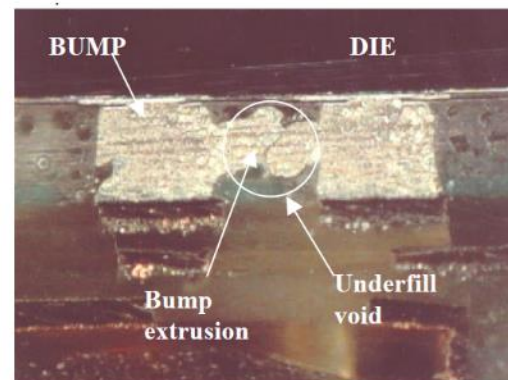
Dark field optical image of x-section of shorted bumps showing that solder extrusion into the underfill void was the mechanism of failure.
